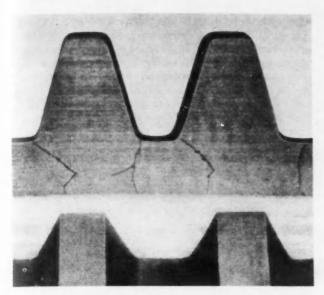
Check marks in hob teeth caused by removing too much metal at once in sharpening the hob
